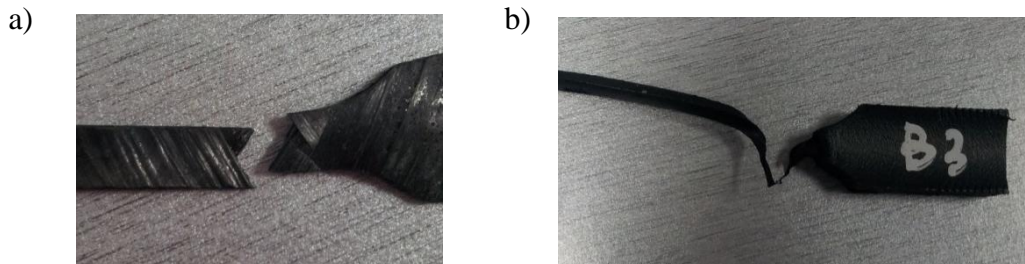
(a) Sample fracture of CFE composite (b) Sample fracture of HDPE
